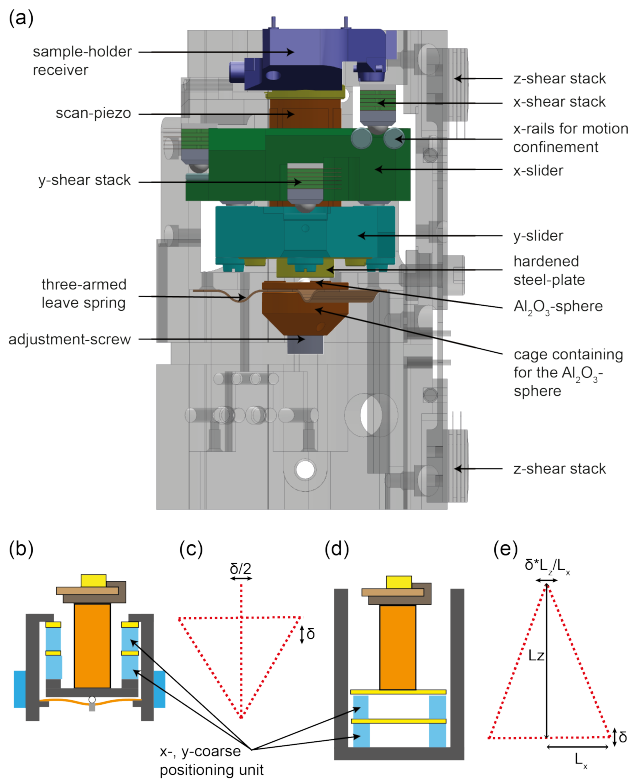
(a) CAD drawing of the z-positioning unit containing the xy-positioning units with scan piezo and mounted to it the sample holder receiver. (b) schematic drawing of the assembly depicted in (a) highlighting the concentric design, and (c), the corresponding stability triangle. (d) schematic drawing of a more conventional design, where the scan piezo is mounted on the top of the xy-positioning unit, and (e), the corresponding stability triangle.
